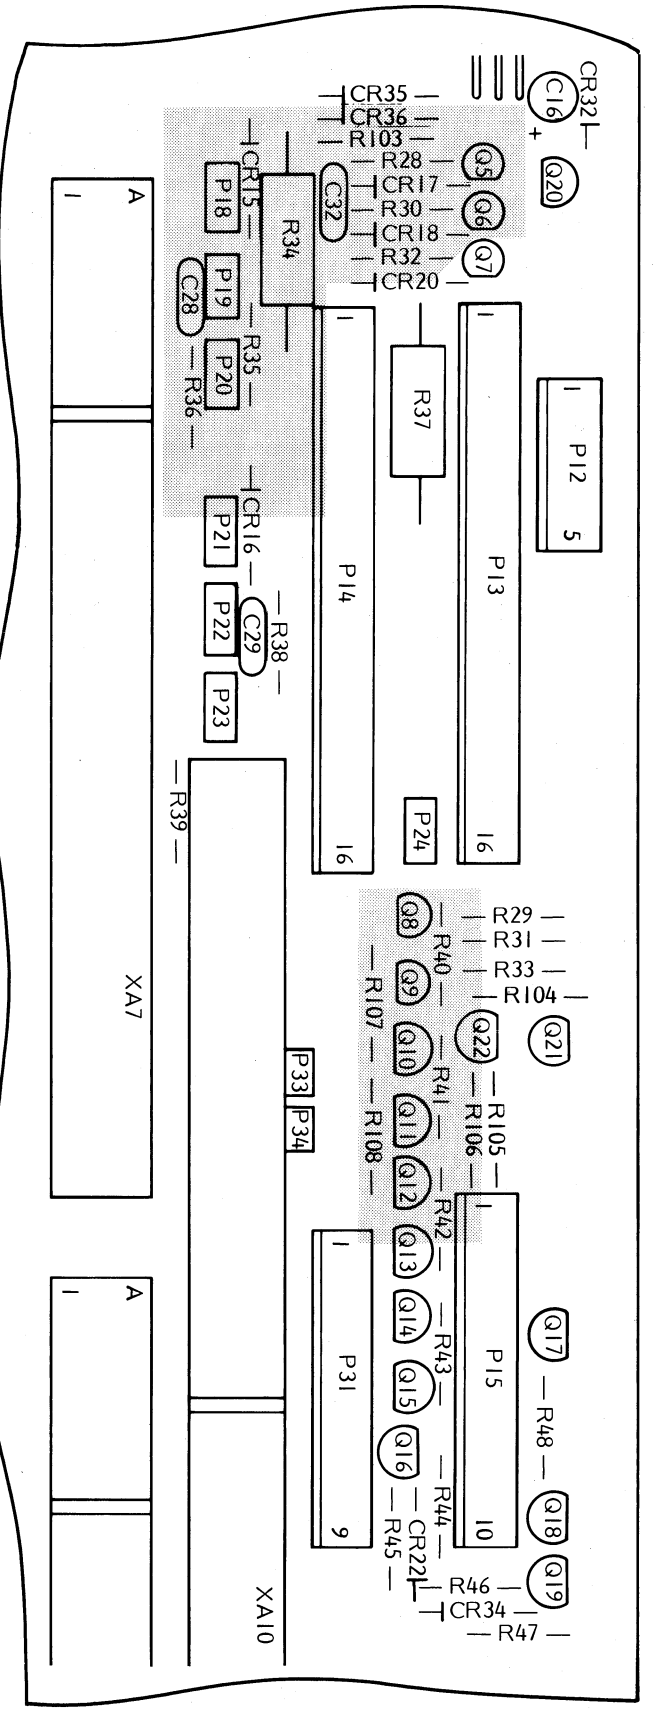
A. A8 YIG Driver PCB, Assy. 660-D-8009-15, -16 Schematic (Sheet 2 of 3)
